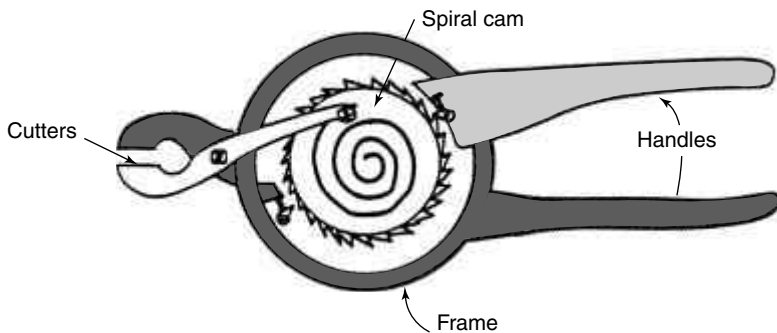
Spiral-cam cutting mechanism (ratchet driven).
